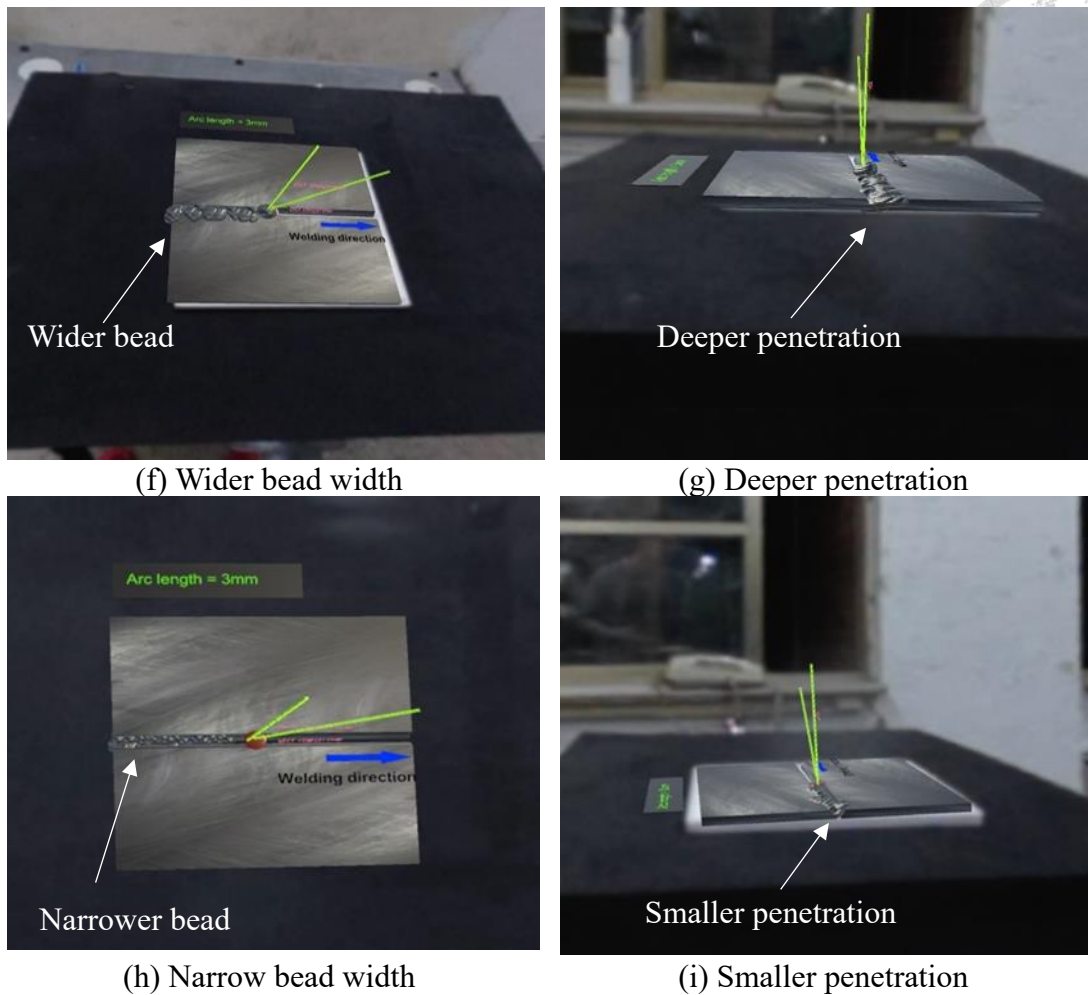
Hands-on welding practice in the MR scene.
